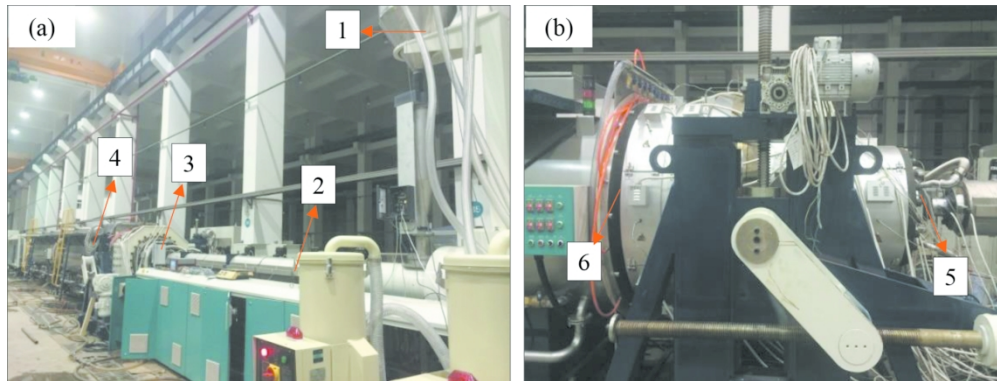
The pipe extrusion line (Model FLSJ150-36DG) produced by Ningbo Graewe-Fangli Extrusion equipment Co., LTD (a: pipe extrusion line, b: spiral mandrel die. 1: resin hopper, 2: extruder, 3: extrusion die, 4: vacuum sizing tank, 5: die inlet, 6: die outlet).
